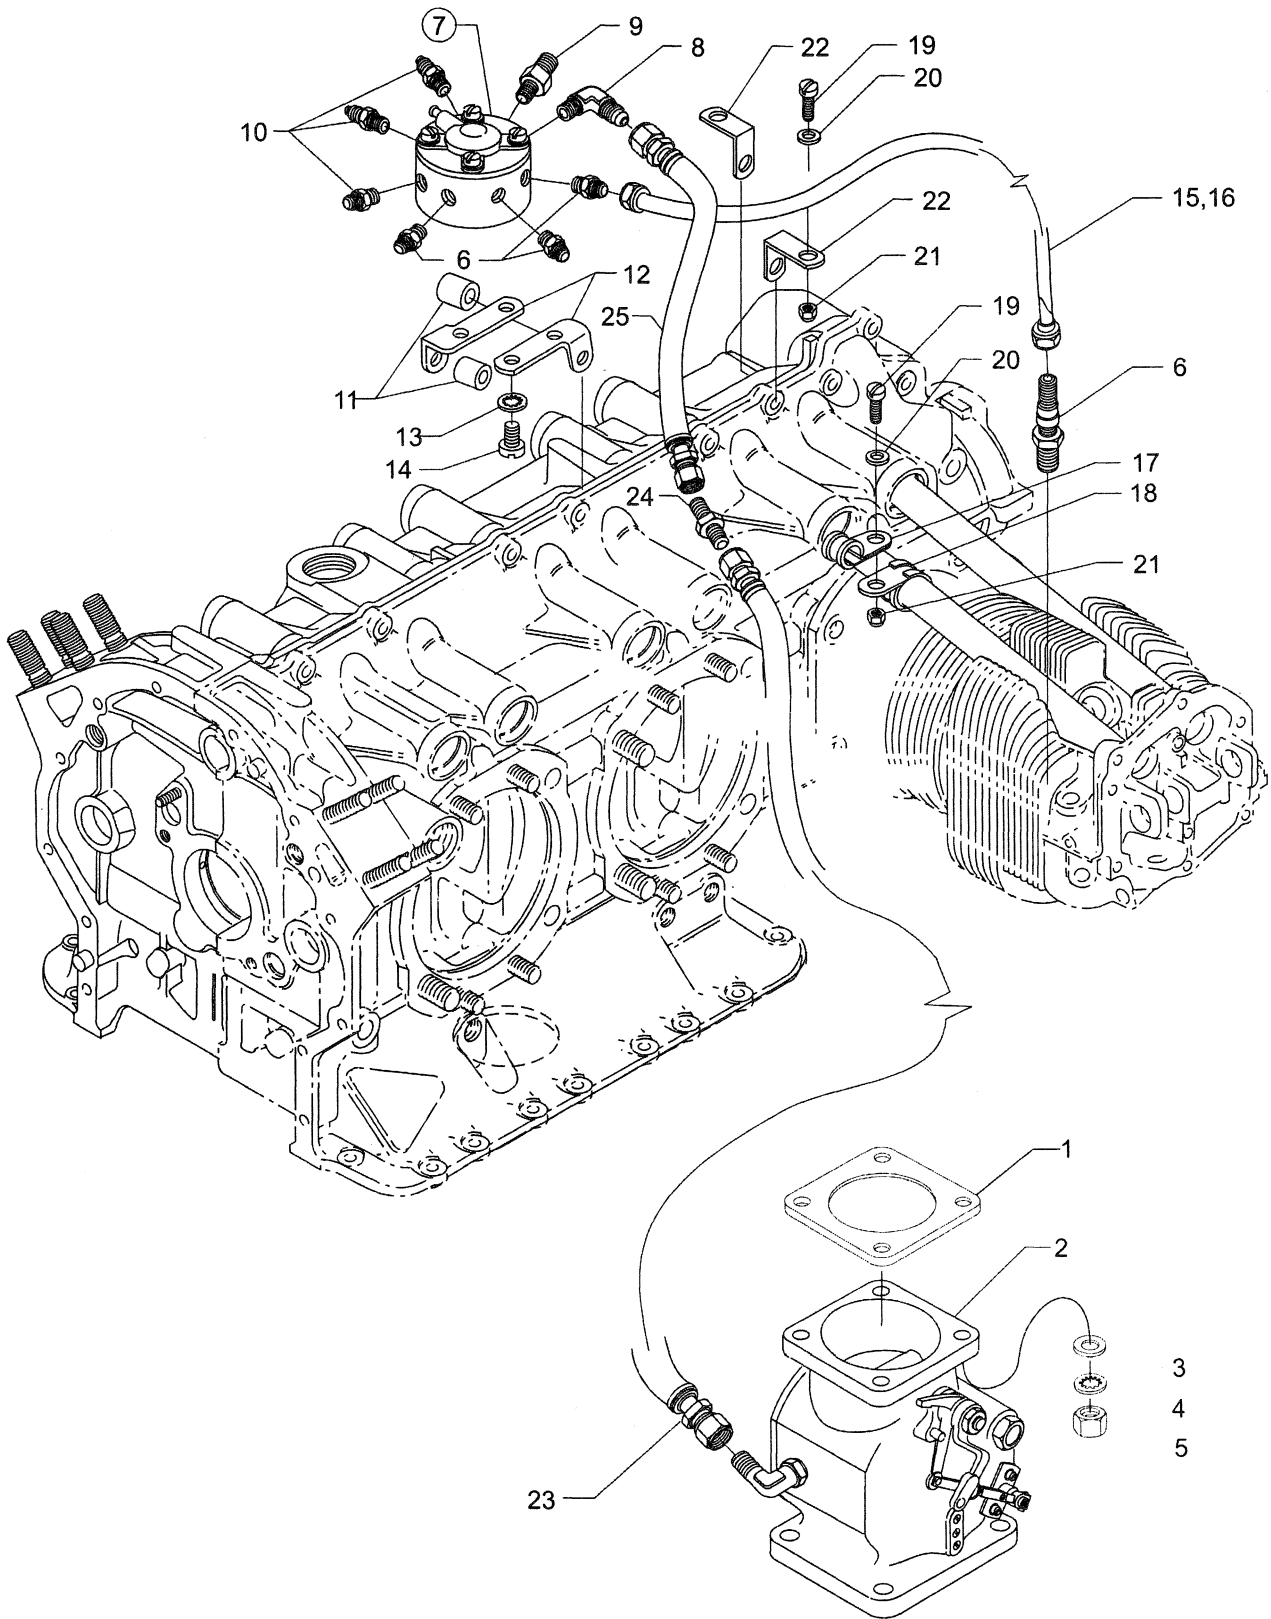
FUEL INJECTOR, FUEL MANIFOLD, INJECTION LINES AND NOZZLES
